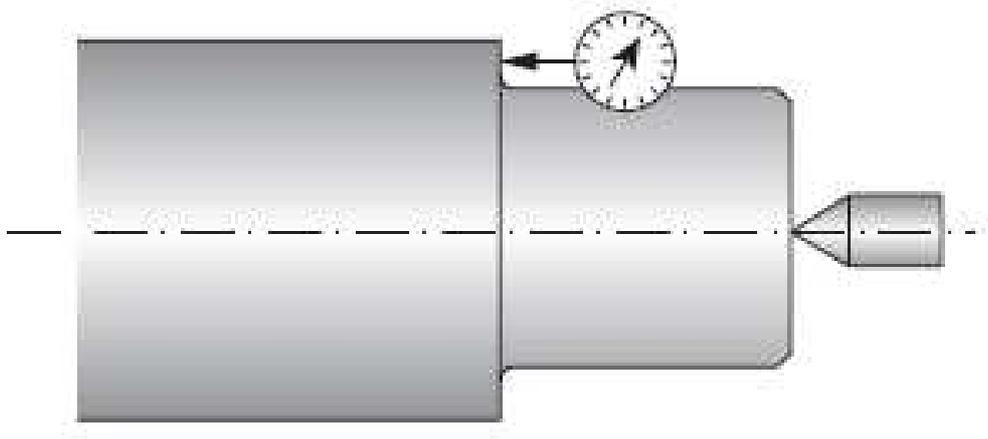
The front part perpendicularity inspection by fitting the arrow deviation indicator
